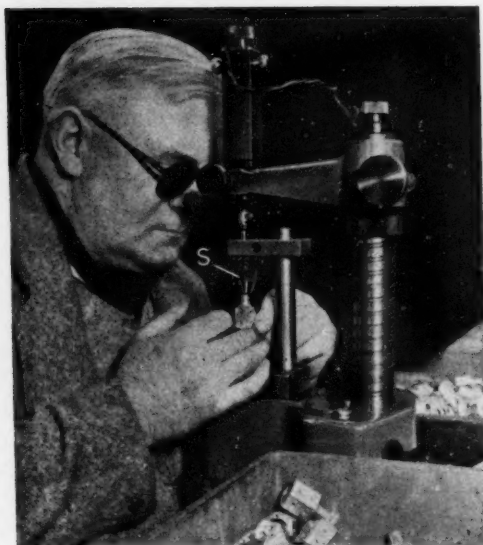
This Blind Operator has been Engaged on Inspection Work for More than Eight Years, and is Here Seen Checking the Depth of the Hole at Each End of a Workpiece, with the Aid of a Sigma Audible Comparator. A Bell Rings when the Depth of the Hole is within the Pre-set Tolerance, and High- and Low-pitched Buzzing Sounds Indicate that the Upper and Lower Limits, Respectively, have been Exceeded
